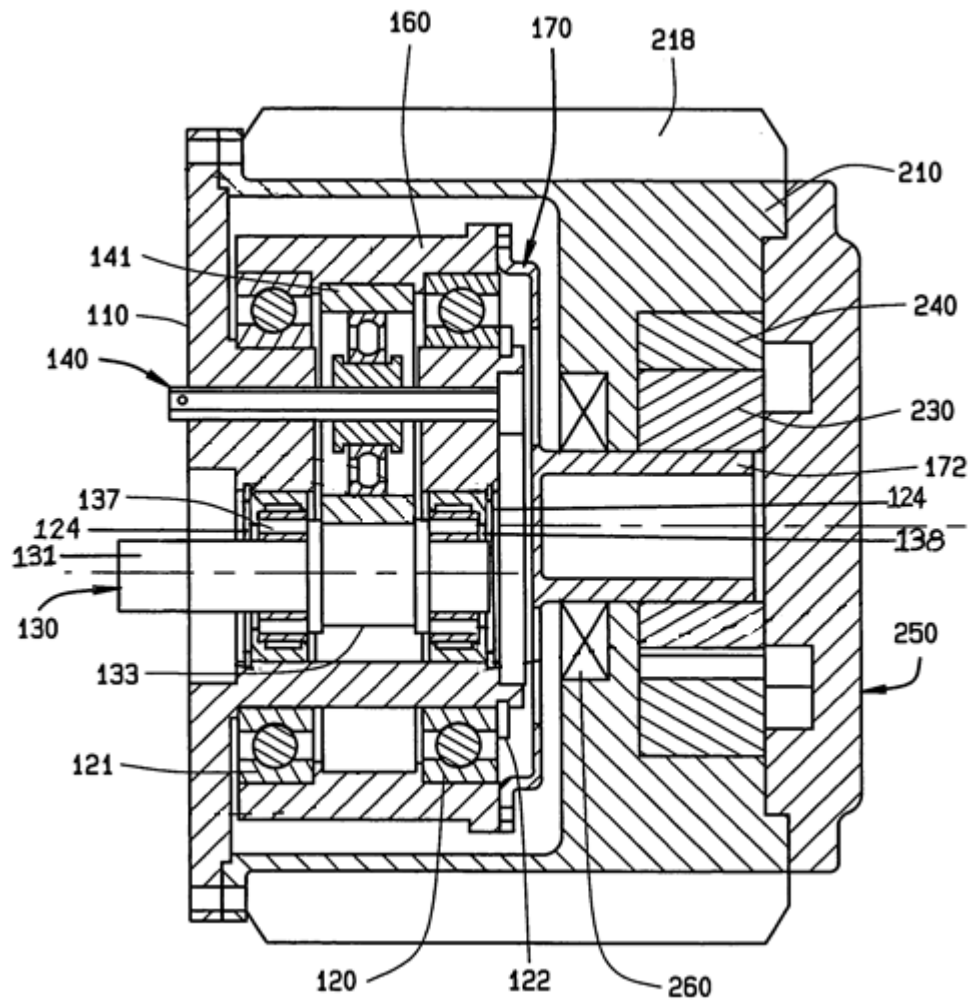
Integrated gear and pump: 110 - carrier ; 120,121 - bearing; 122, 124 - a snap ring; 130 - sun roller assembly; 131 - a sun roller ; 137,138 - bearing; 140- a planet assembly; 141- a planetary roller; 160 - outer ring; 170- output plate shaft; 172 - driving shaft; 210 - housing; 218 - fins; 230 - rotor; 240- ring gear; 250- end cover; 260-bidirectional seal
